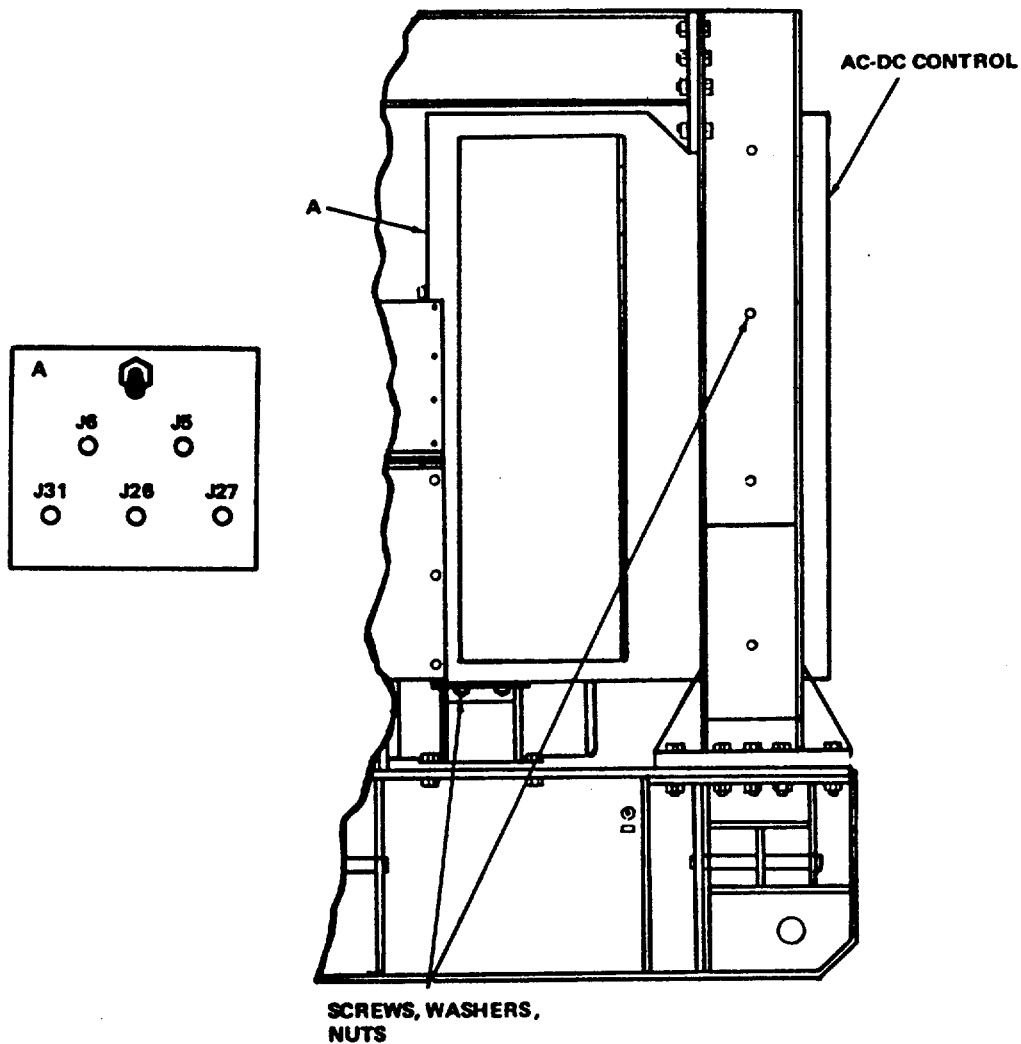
AC-DC Control Box Assembly, Removal and Installation
